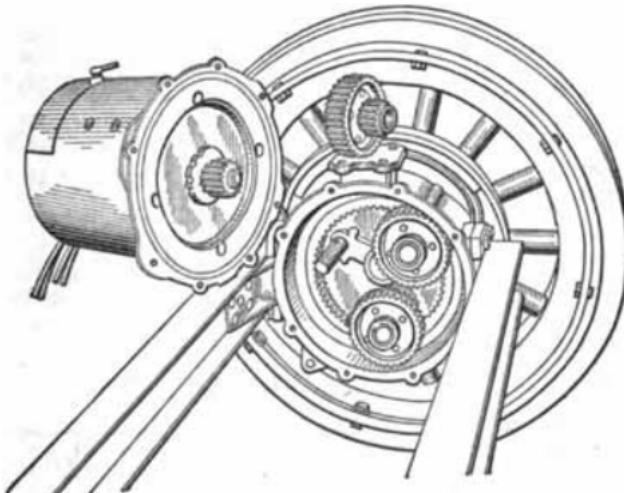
Concentric gear drive. (Commercial Truck Company.)
